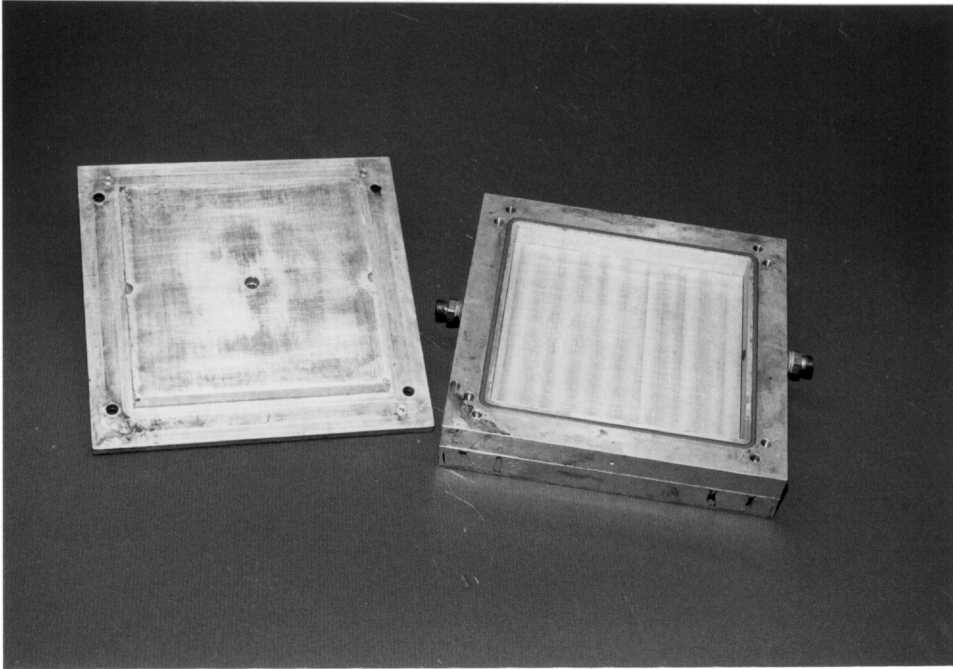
Photograph of the aluminum mold used to manufacture RTM composites.
